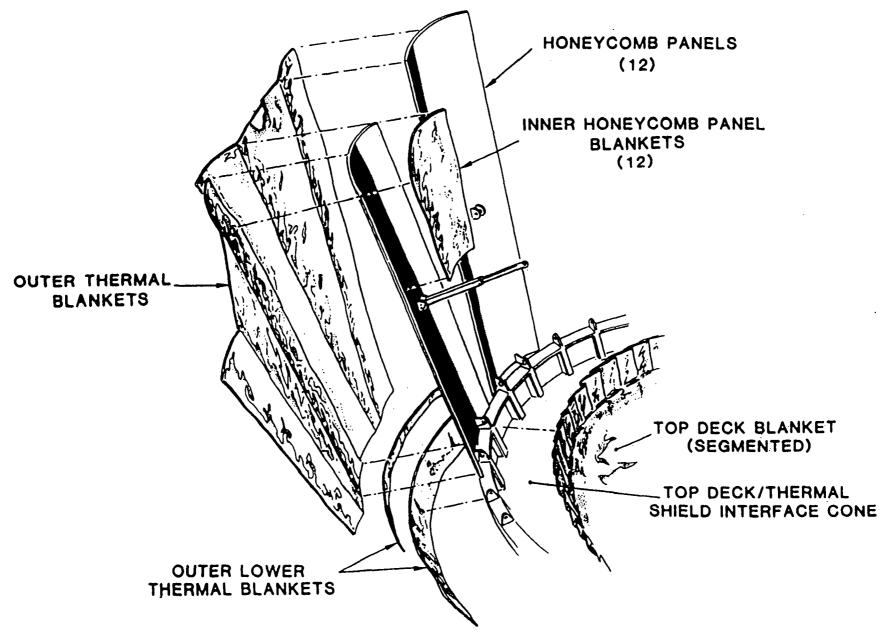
EXPLODED VIEW OF COBE SPACECRAFT
